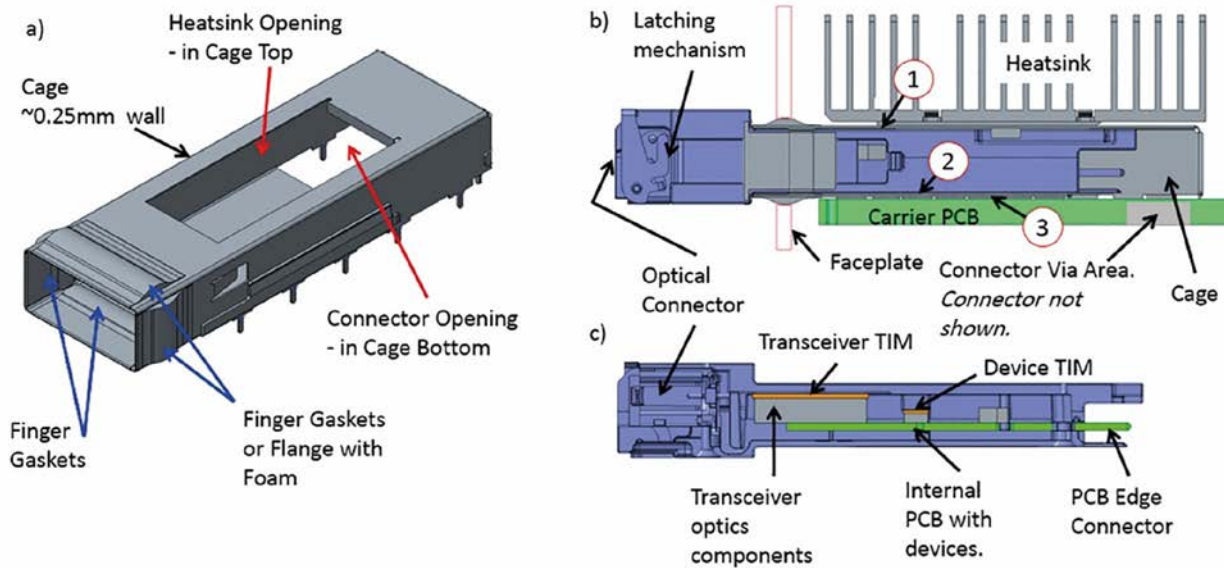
Cage design and section showing typical internal layout. Narrow air gaps locations in image (b): module to top of cage (1), module to bottom of cage (2), bottom of cage to PCB (3), and, not shown, sides of module to sides of cage (4).
